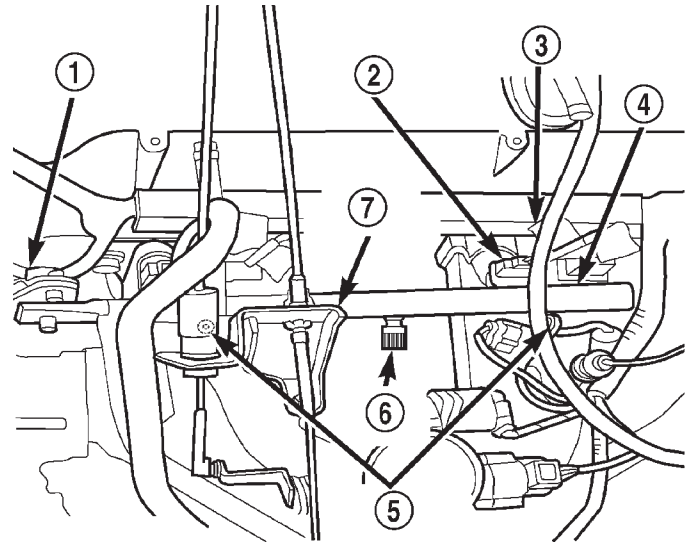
Fuel Injector Rail—4.7L V-8 Engine
